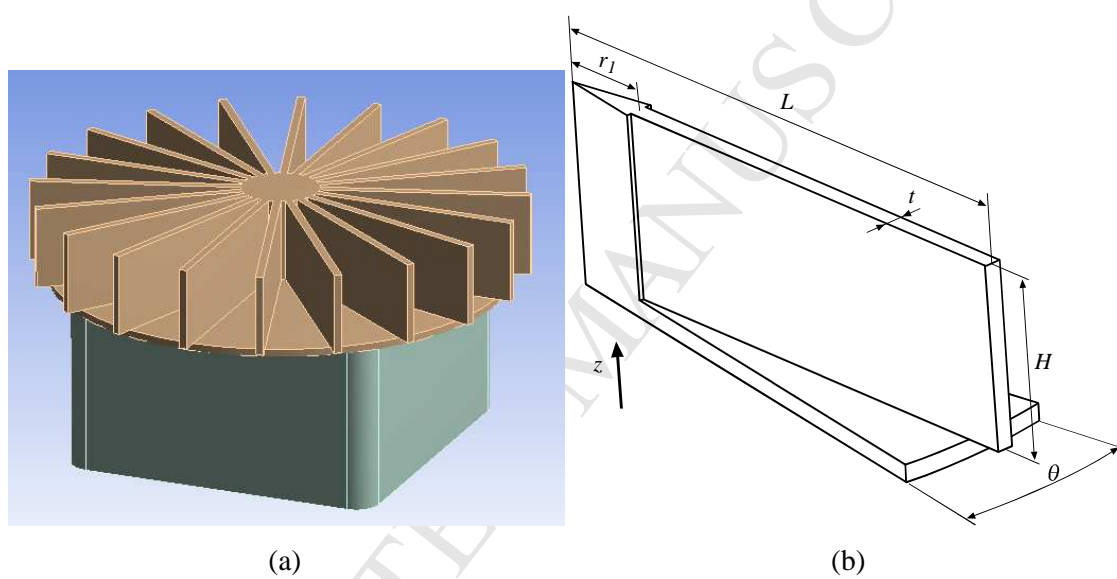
The heat sink. (a) 3D view of the ensemble; (b) geometrical parameters.
